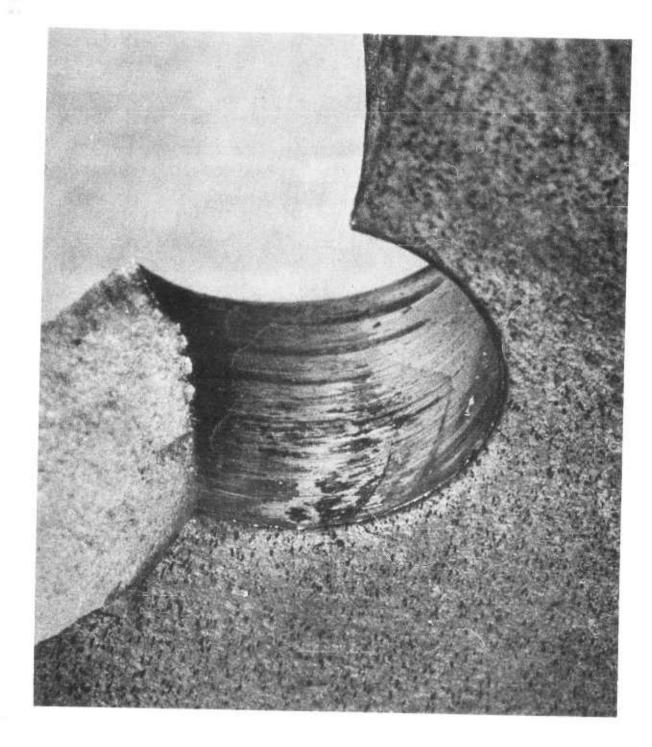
Rear Spar Fracture Area -- View of Crack in Burr
